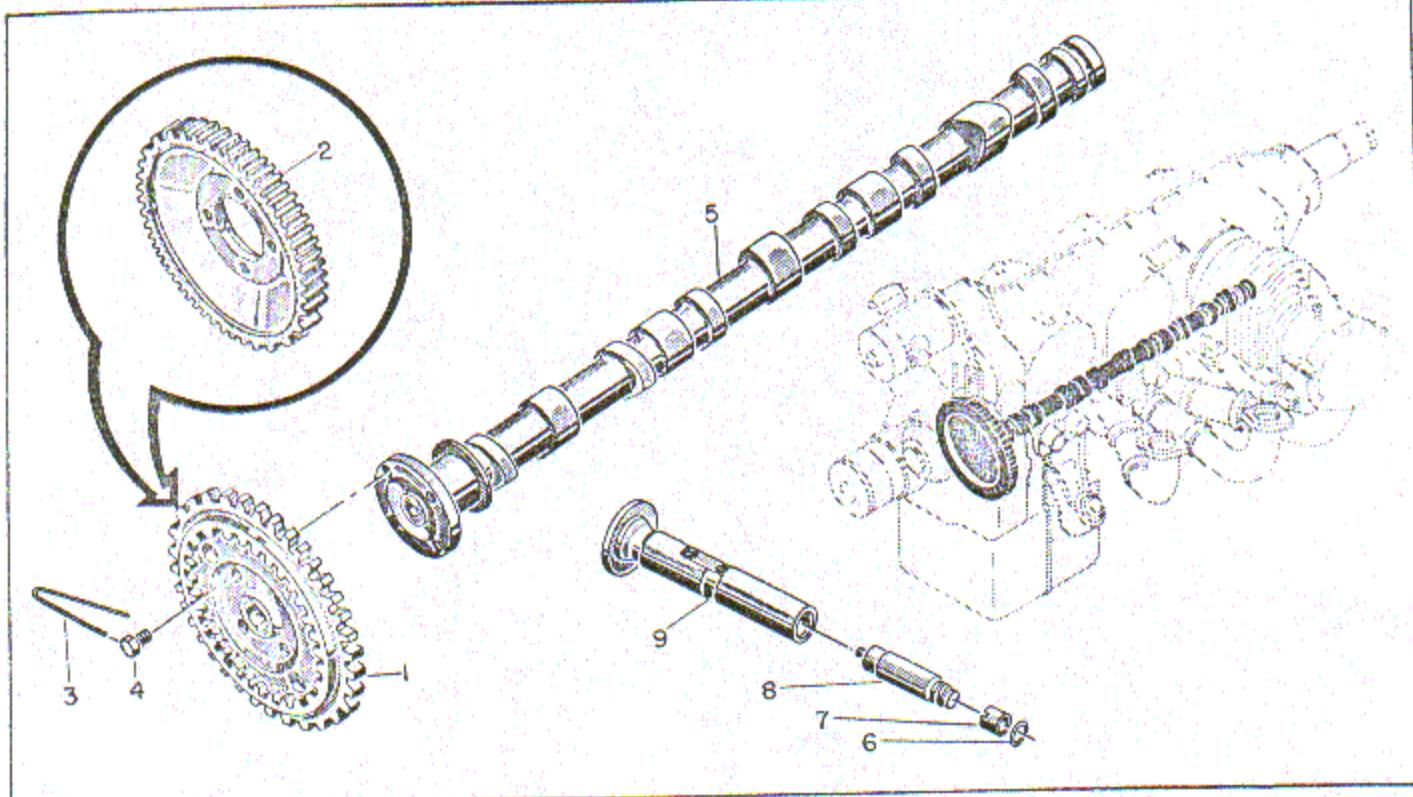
Exploded Parts View of Camshaft and Valve Lifters
